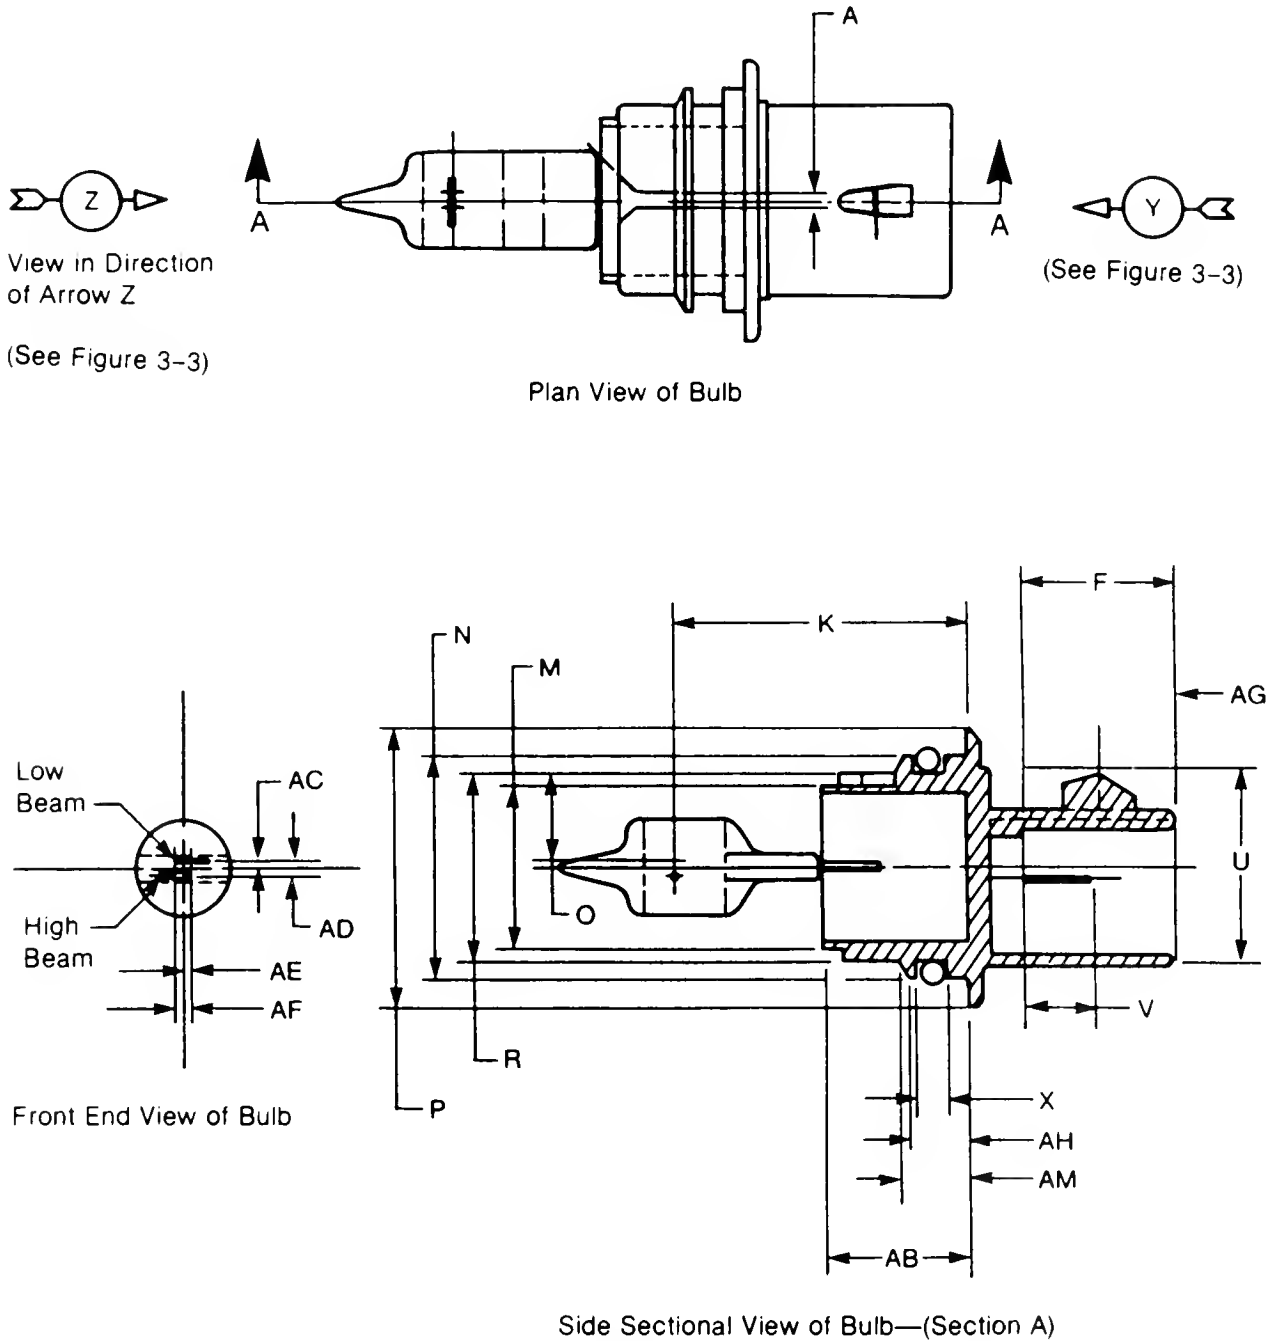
Interchangeability Drawing of Headlamp Bulb Assembly
